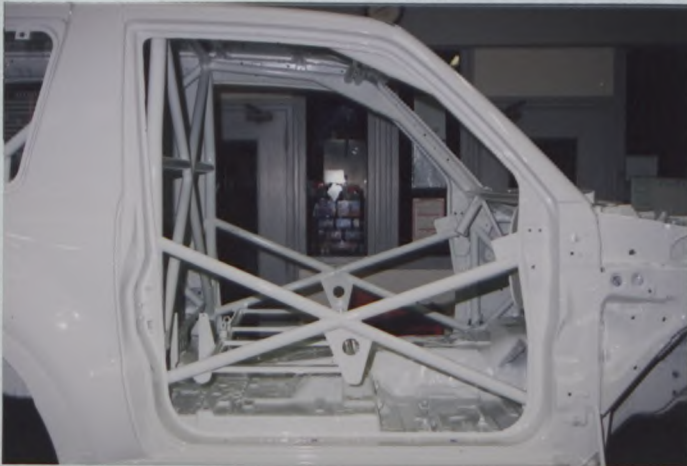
MAIN HOOP TO FLOOR-LEFT
